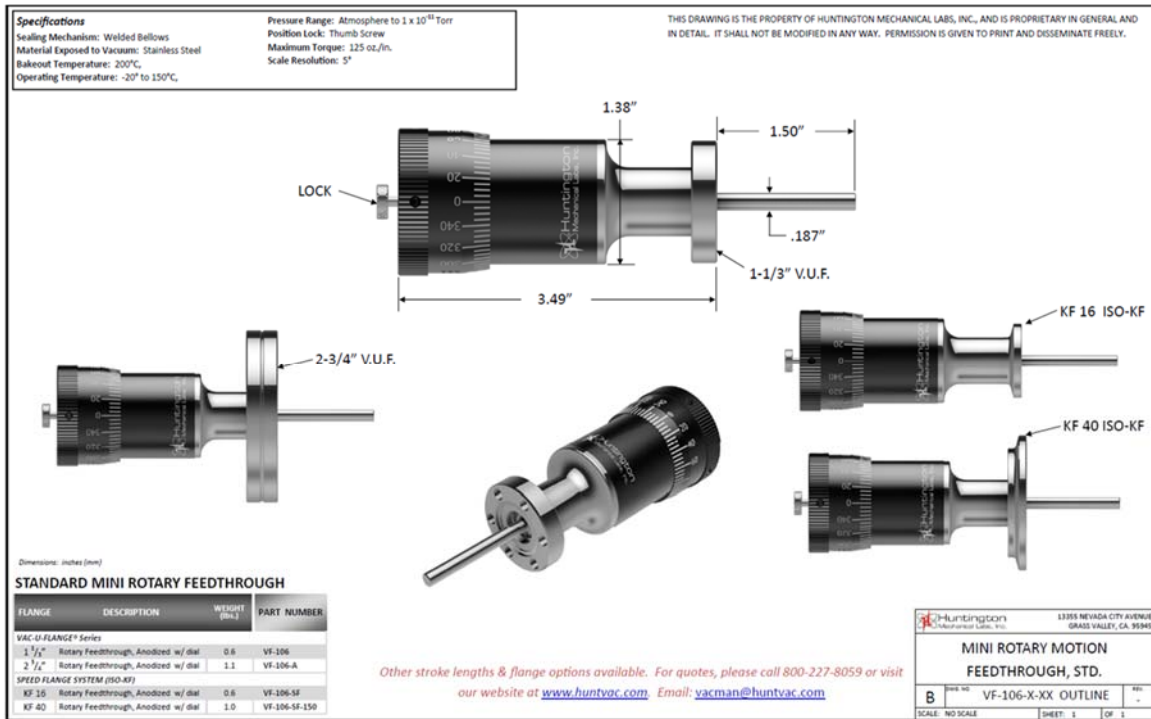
Mechanical drawings of the rotary feedthrough used to actuate the Faraday cup on the ELG-2 electron gun [112].
